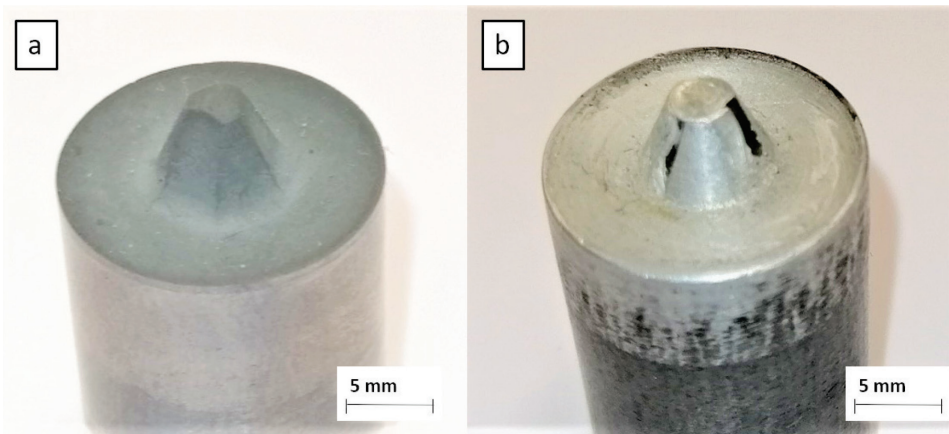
Image of the FSW tool (75TiC-NiMo) before (a) and after welding of aluminium alloy (b).
